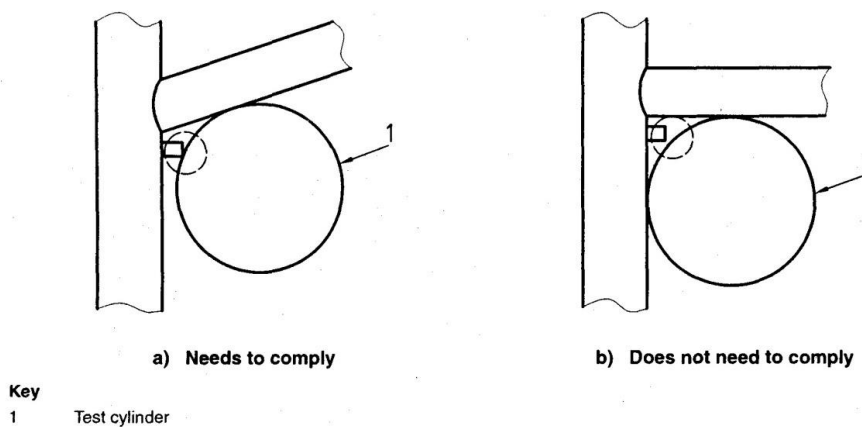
EXAMPLES OF EXPOSED PROTRUSIONS
